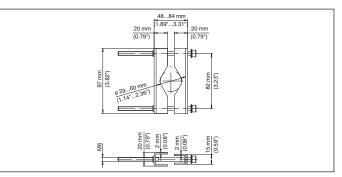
Dimensions Brackets for tube mounting VEGAMET 841, 842
